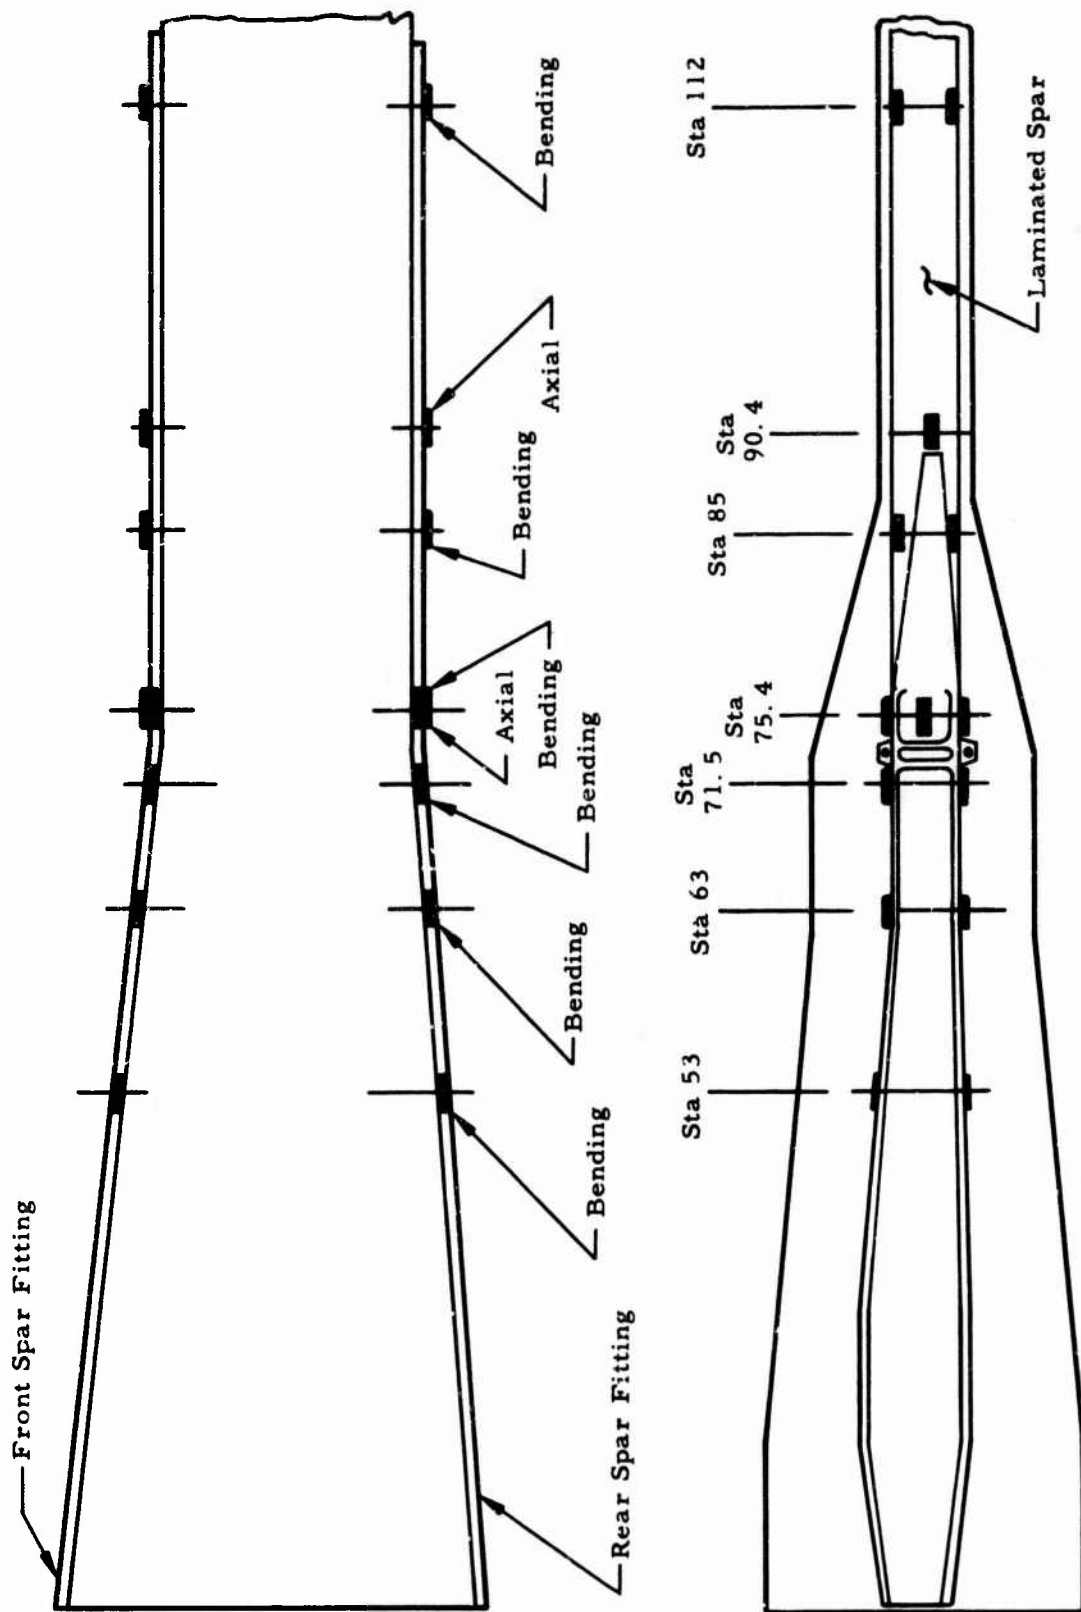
Blade Root-End Fatigue Test - Instrumentation Locations - Specimen 1.
